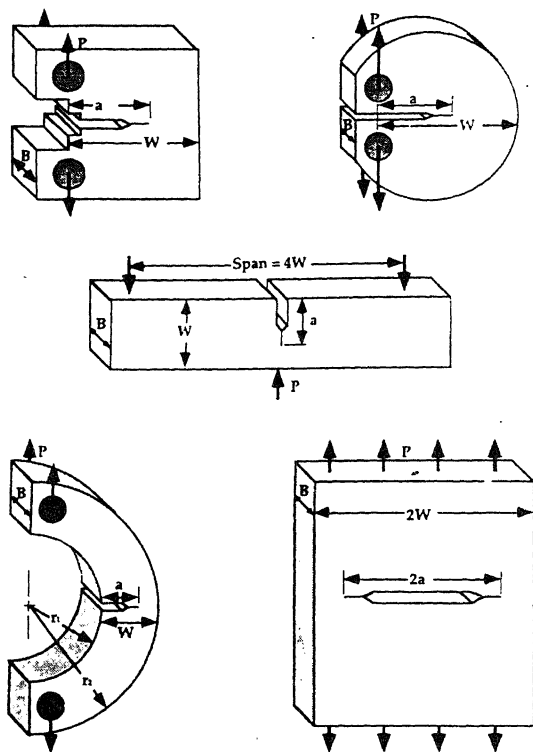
Typical specimens used in fracture mechanics for testing, after Anderson. (1991) (a) Compact specimen. (b) Disk shaped compact specimen. (c) Single edge notched bend (SENB) specimen. (d) Arc shaped specimen. (e) Middle tension (MT) specimen.
